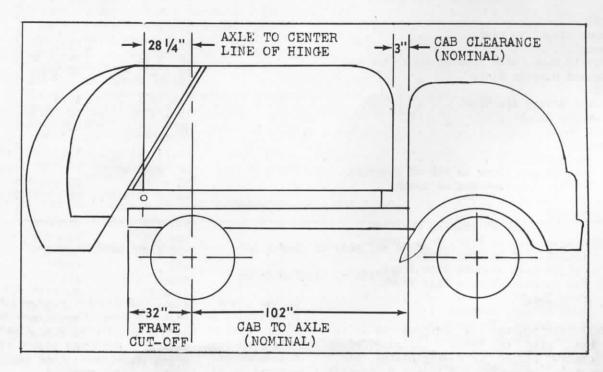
Location of 16 Yd. Body on Single Axle 102" C/A Truck Chassis
